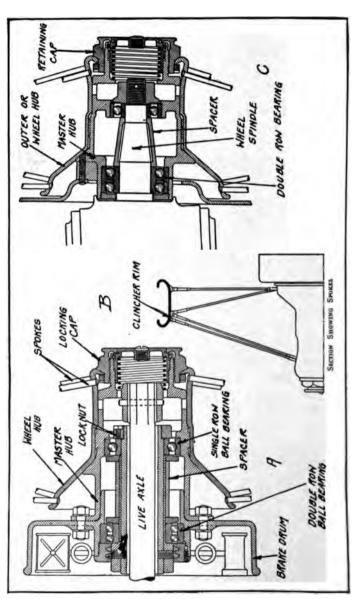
Sectional View Showing Construction of the Dunlop Quick Detachable Wire Wheel.
